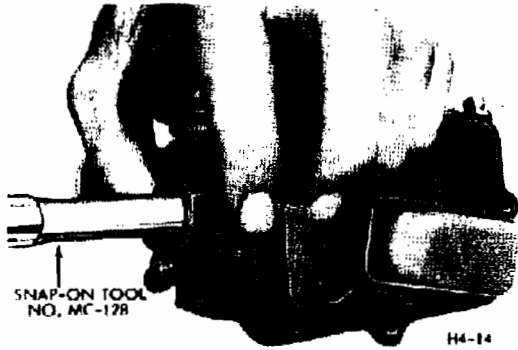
Removing Fuel Inlet Seat Retainer Screw
